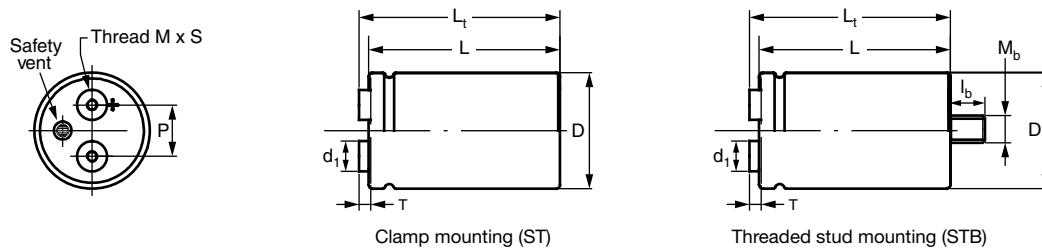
B - High current M6-18 mm disc and 1/4-28 UNF disc: Screw Terminal (ST) and Screw Terminal Bolt nut (STB)
